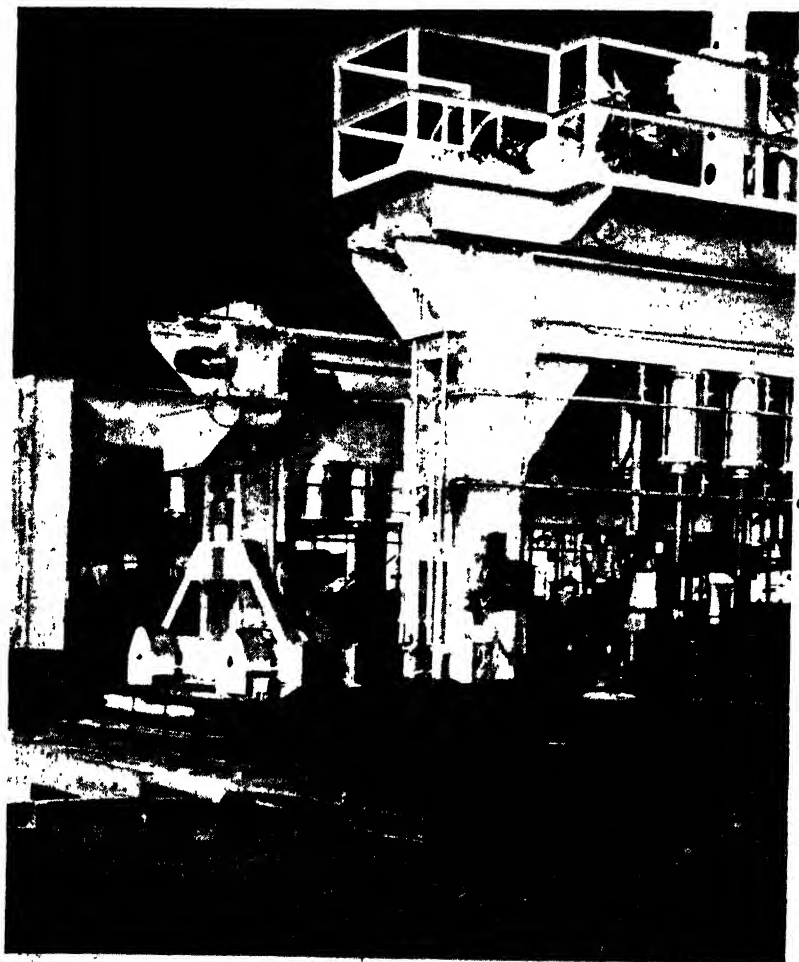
Large Three-station Welding Machine used in Ship Construction for Automatically Welding Structural Steel Stiffeners to Both Sides of Ship Plates
